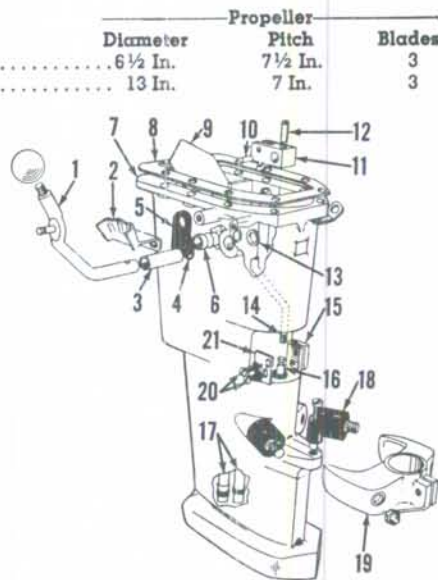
Exploded view of lower motor housing and associated parts used on Fleet Scott and McCulloch 14.
